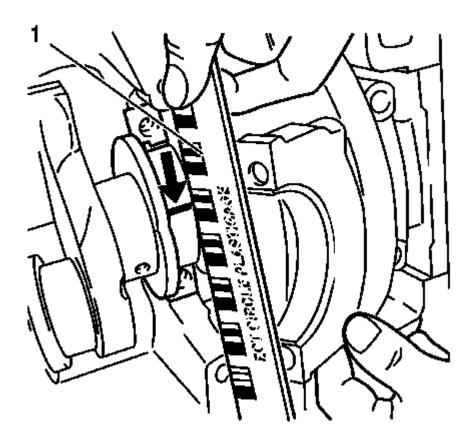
Measuring Crankshaft Bearing Play Using Measuring Scale Courtesy of GENERAL MOTORS COMPANY
